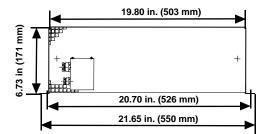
Mounting Dimensions for 460V External Shunt (P/N M.1302.7061)
